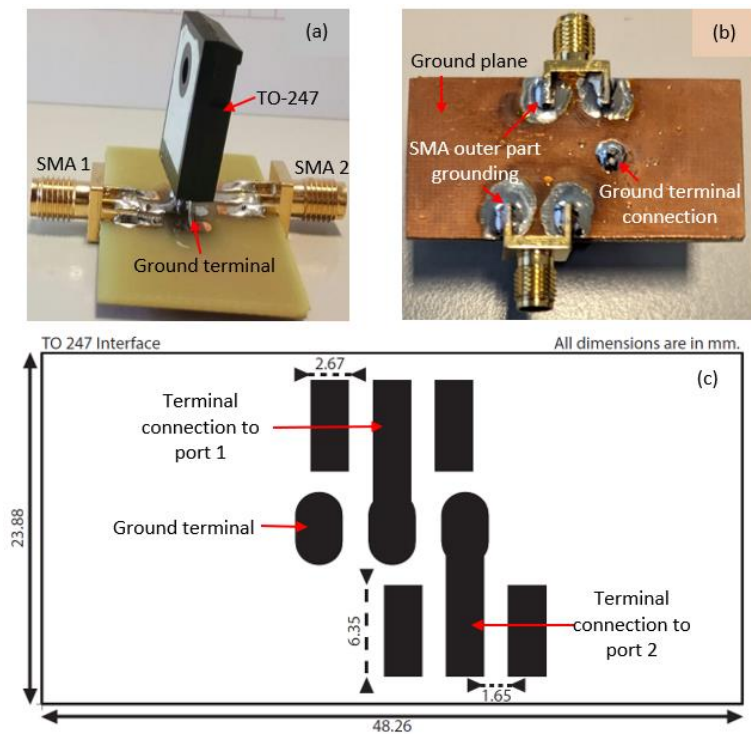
Epoxy interface of TO-247 package vertically placed (a) top view, (b) bottom view, and (c) footprint of top view
